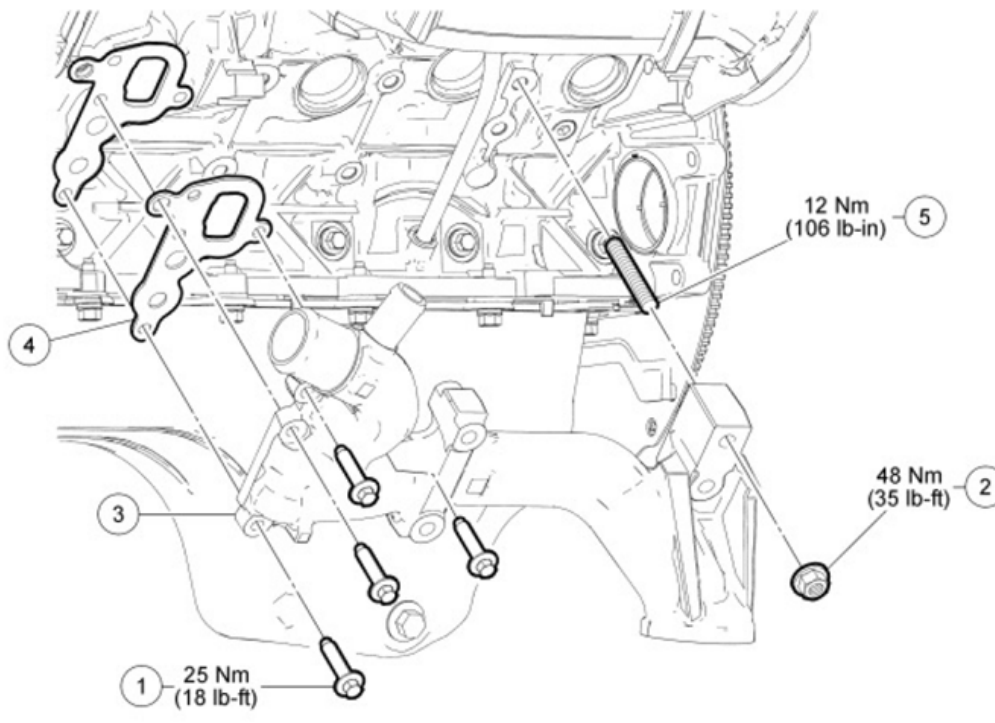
Identifying Oil Filter Adapter And Gasket With Torque Specifications
